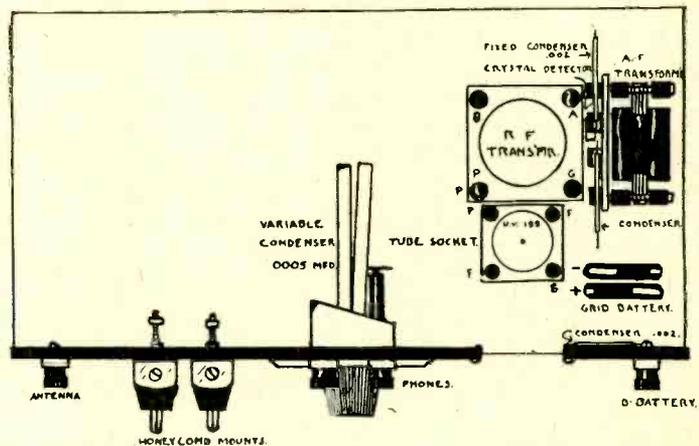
Panel layout and arrangement of parts on base for efficient wiring. A hook type condenser is used for convenience and to save space.
